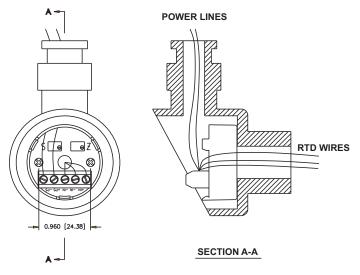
Assembly of the Transmitter inside an PR-14 Protection Head
